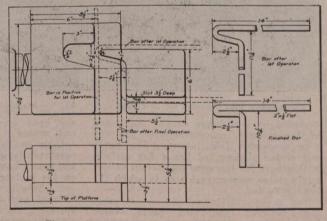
Box Car Corner Bracket Forming Blocks.
